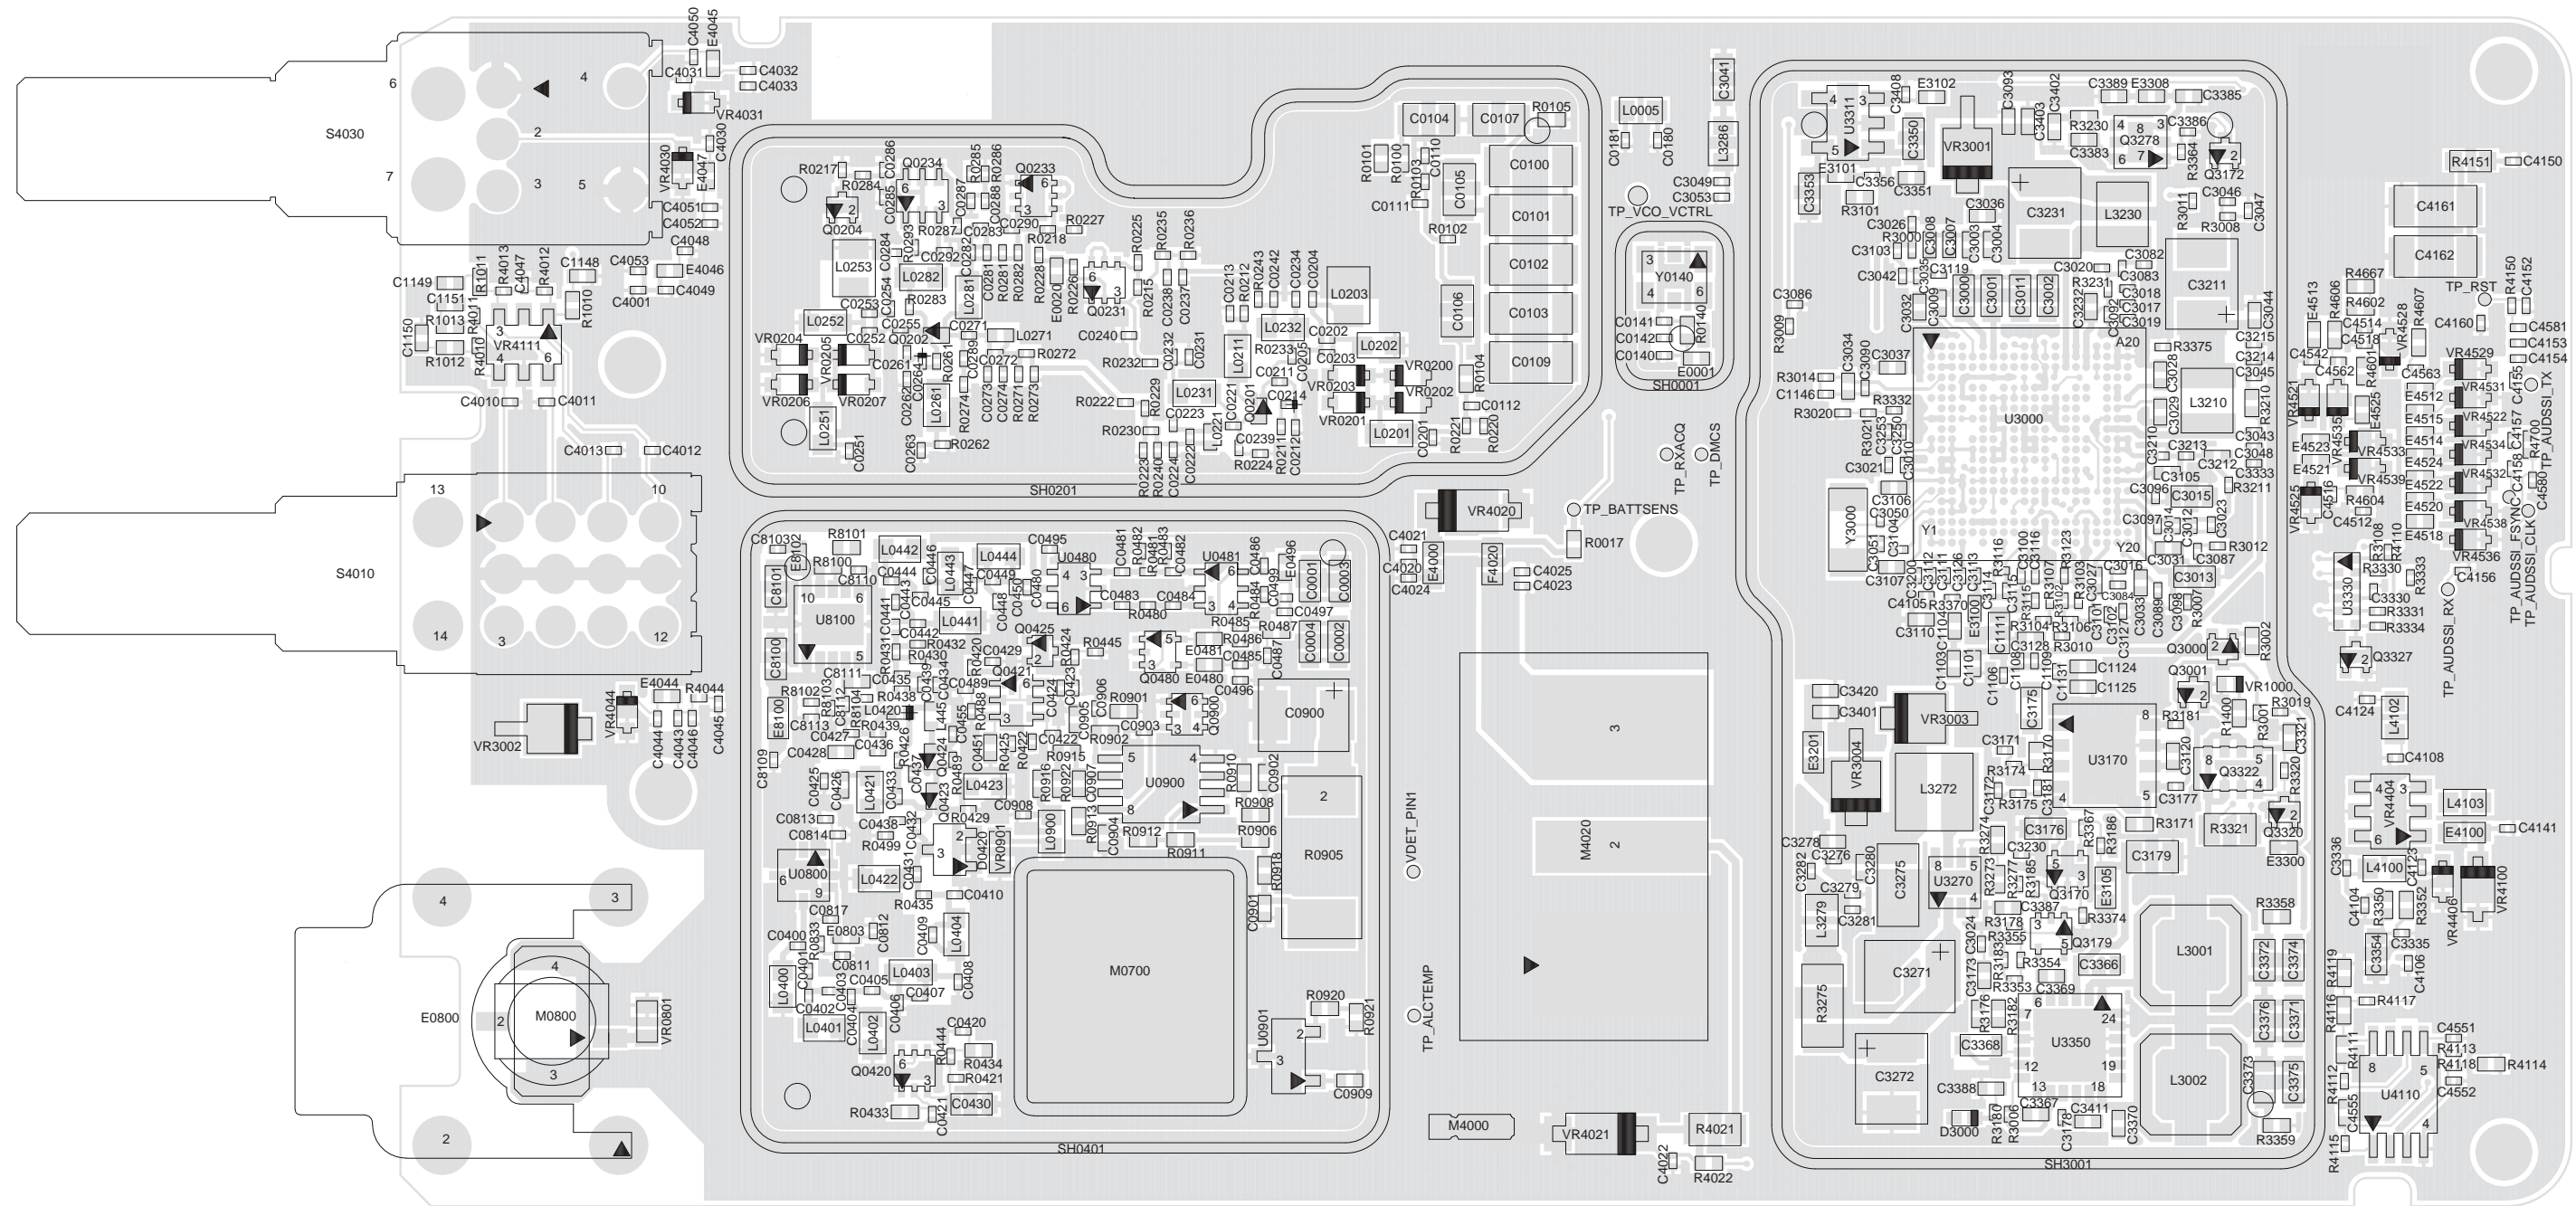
Main Board VHF Bottom Side PCB No. PC000975A01\_AA
